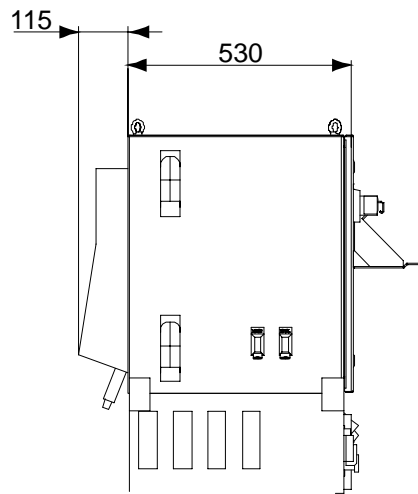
Cabinet layout showing fan at rear incl. dimensions and cable connection (dimensions in mm).
